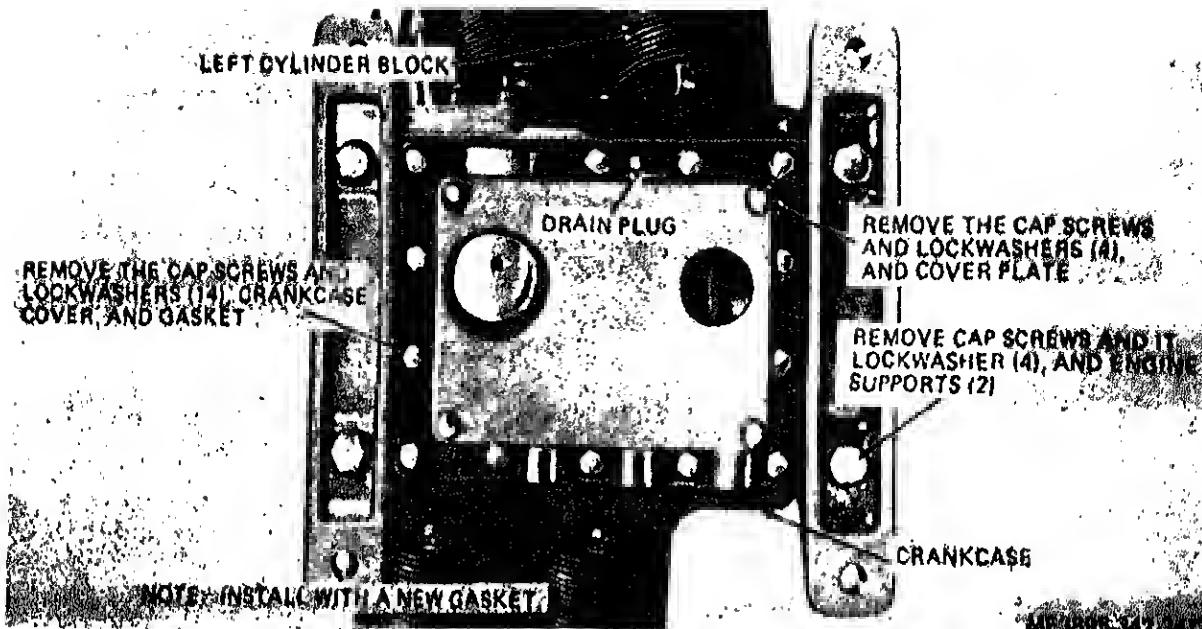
Crankcase cover plate, cover, gasket, and engine supports removal.
